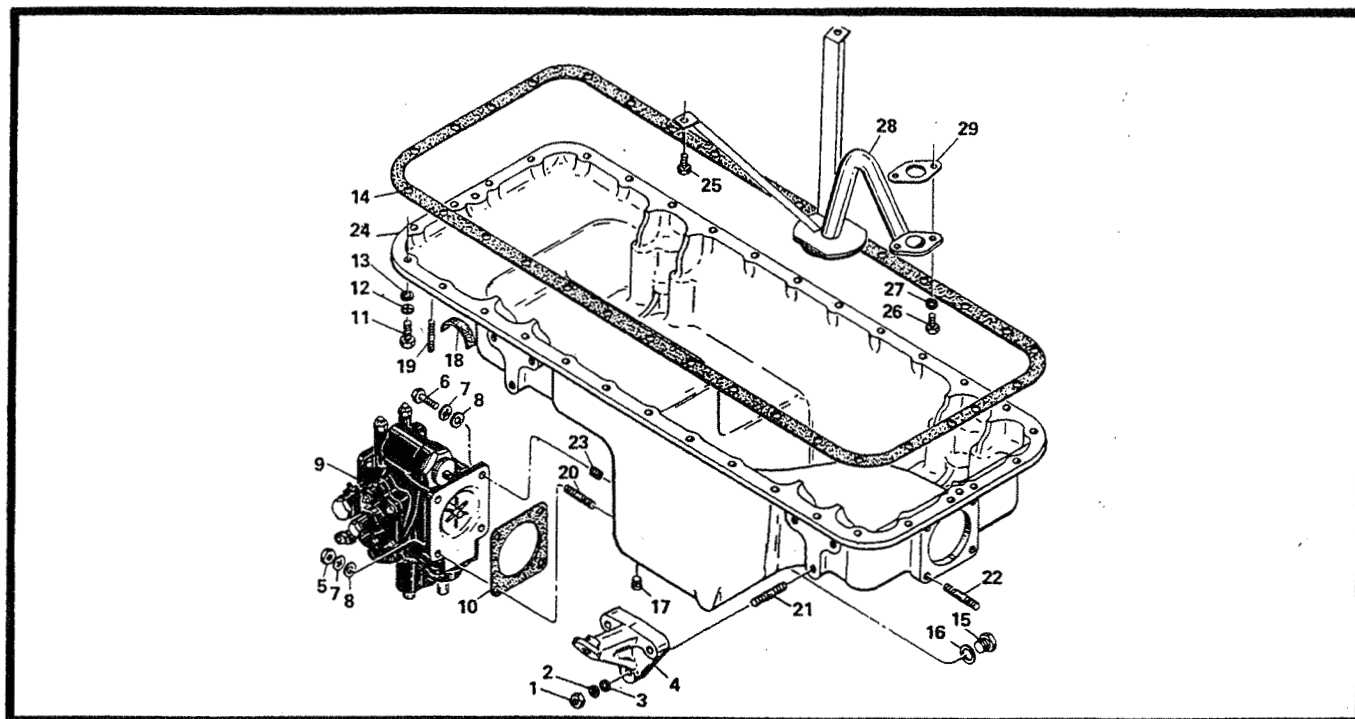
B. OIL SUMP, O-470-G & P.
